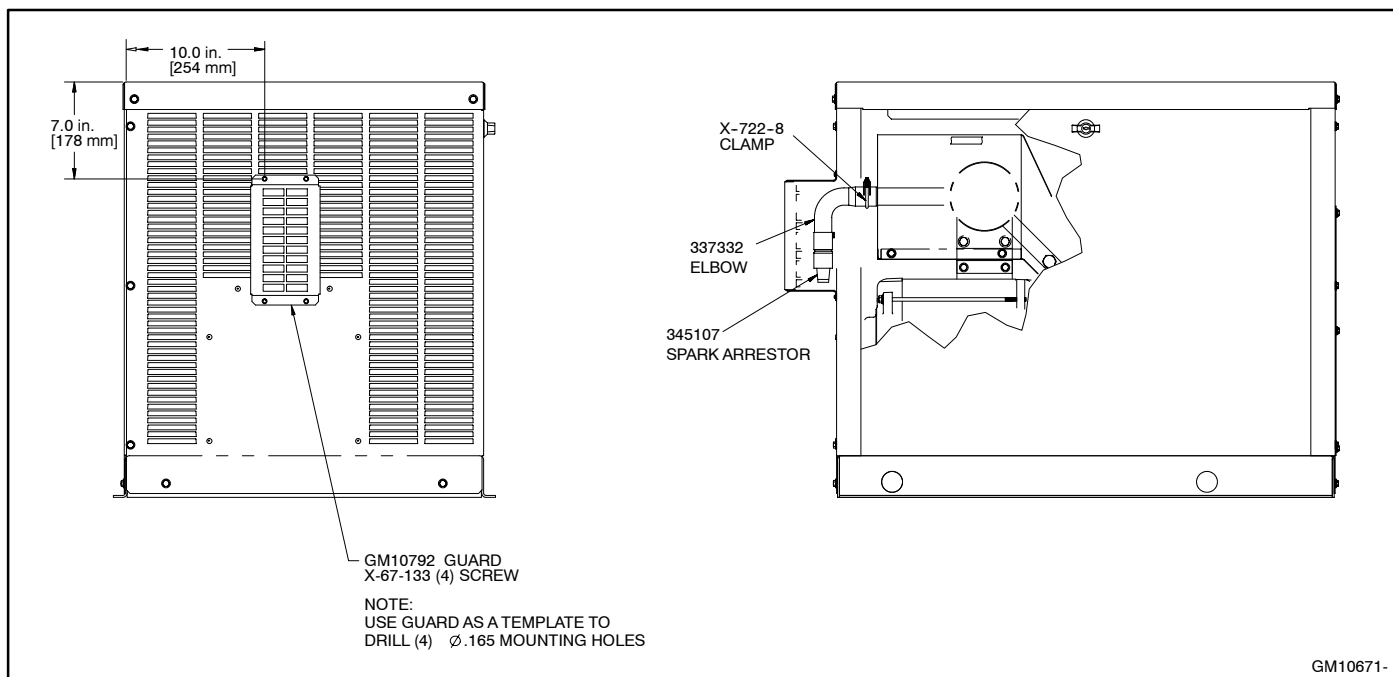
Installed Exhaust Guard and Elbow Kit GM10671-KP1, 8.5/11RMY Generator Sets
